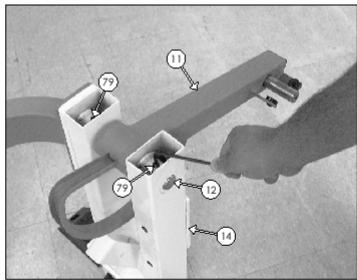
Secure the Pivot Axle (#12) to the Side Frame (#14) using two Socket Set Screws 3/8-16 X 1/2 (#79).
